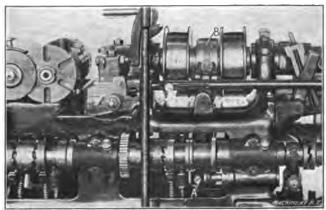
Rear View of No. 00 Brown & Sharpe Automatic Screw Machine showing Reversing Mechanism
